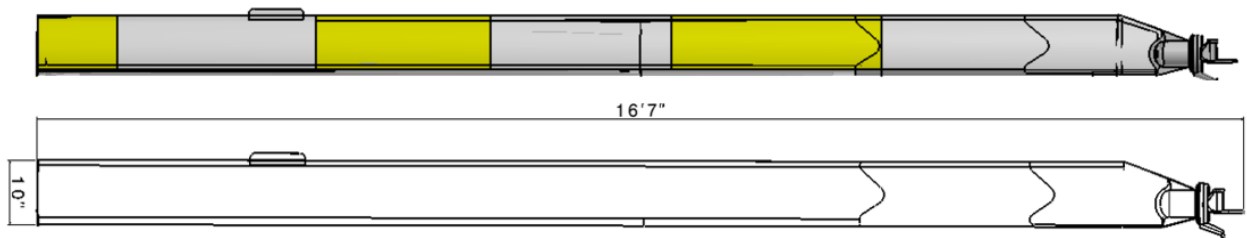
Part 27 Rotorcraft main rotor blade overall dimensions.
